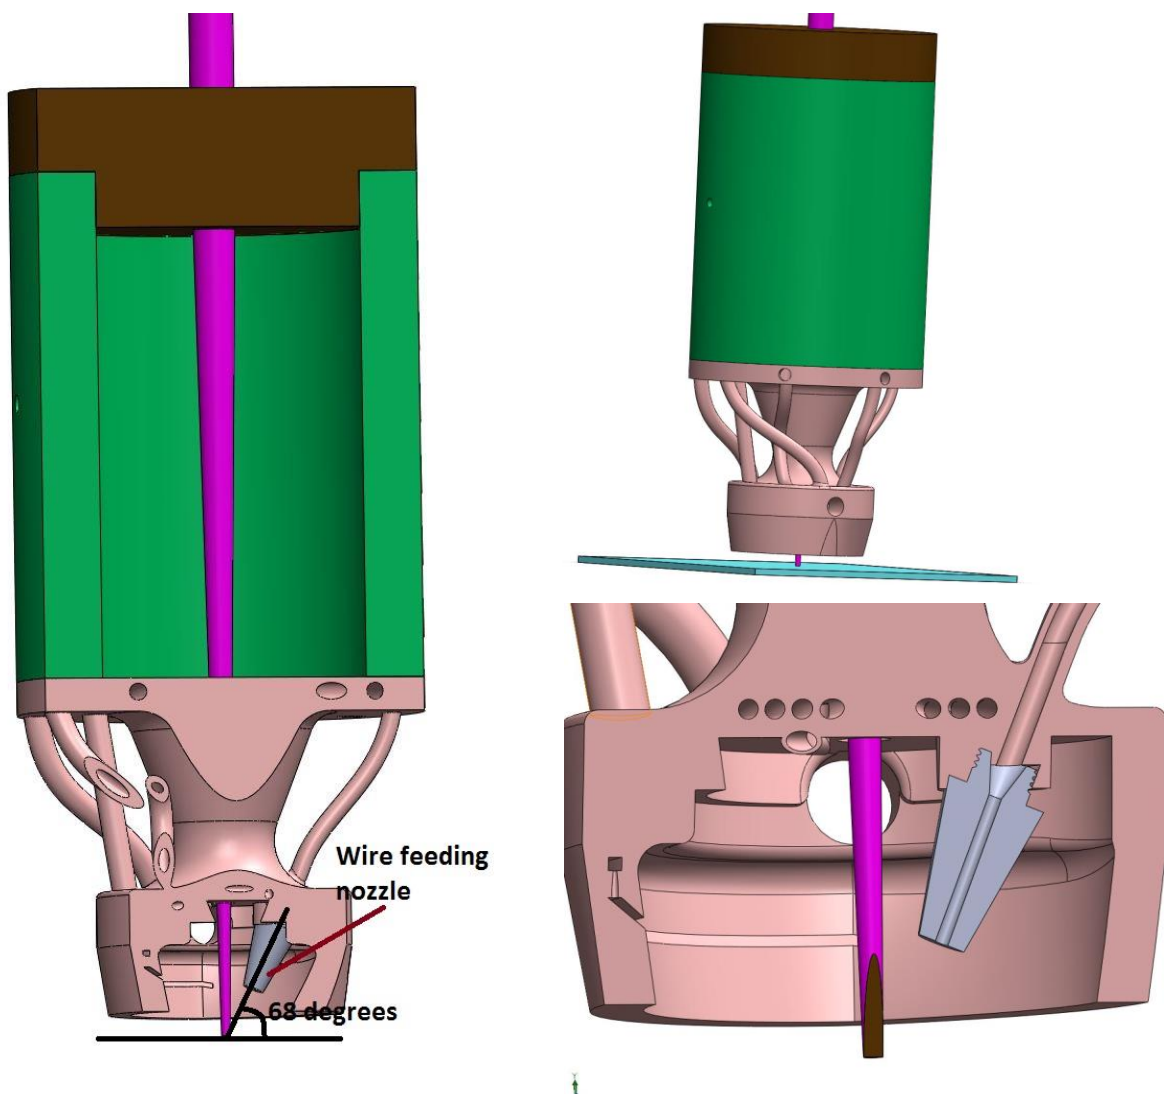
Various section views of final set up ready for LMD process with multipurpose nozzle.
